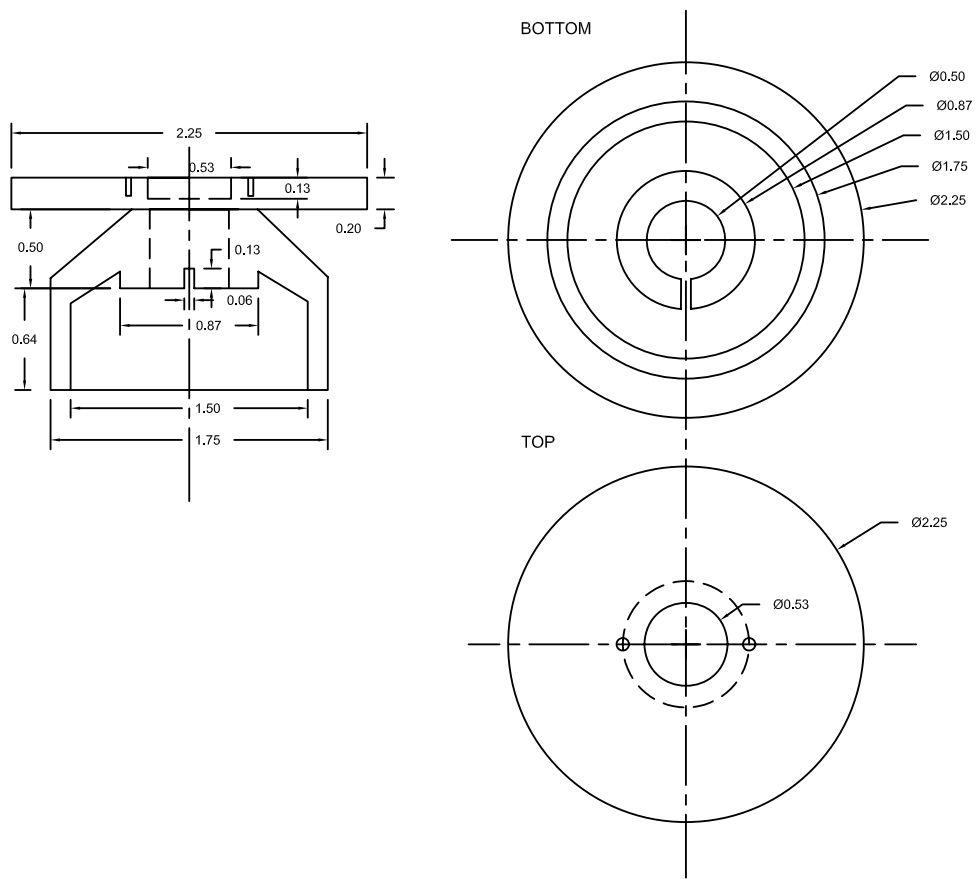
Drawing of the revised aluminum chuck for Brewer Science CE-200 spin coater. All units are in inches.
